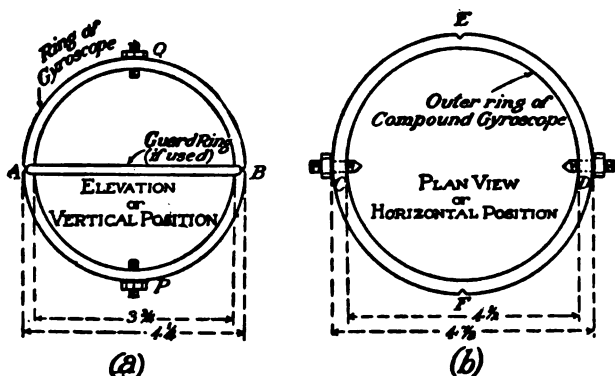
(a) inner and (b) outer rings of gyroscope.
